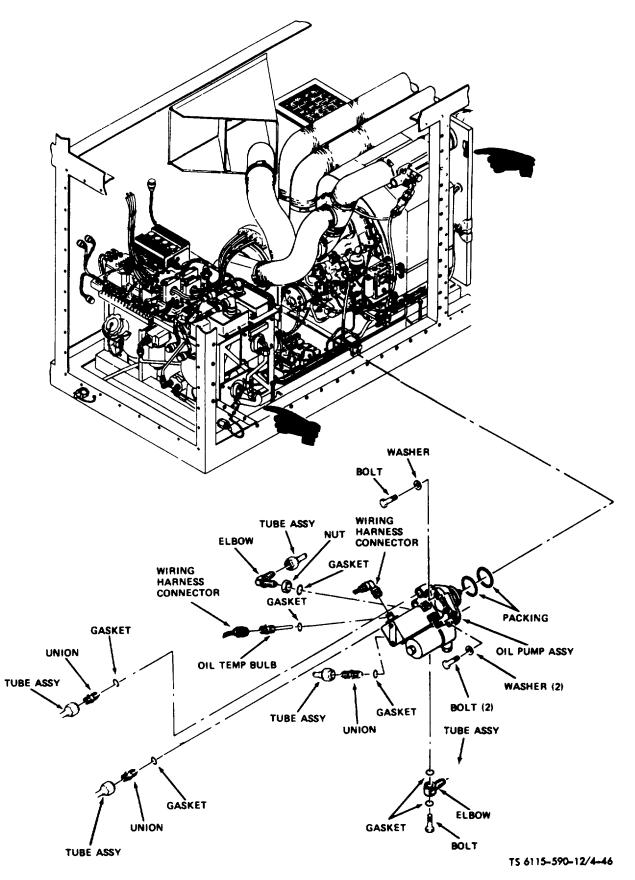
Oil Pump Replacement (TS 6115-590-12/4-46). Change 6 4-102
